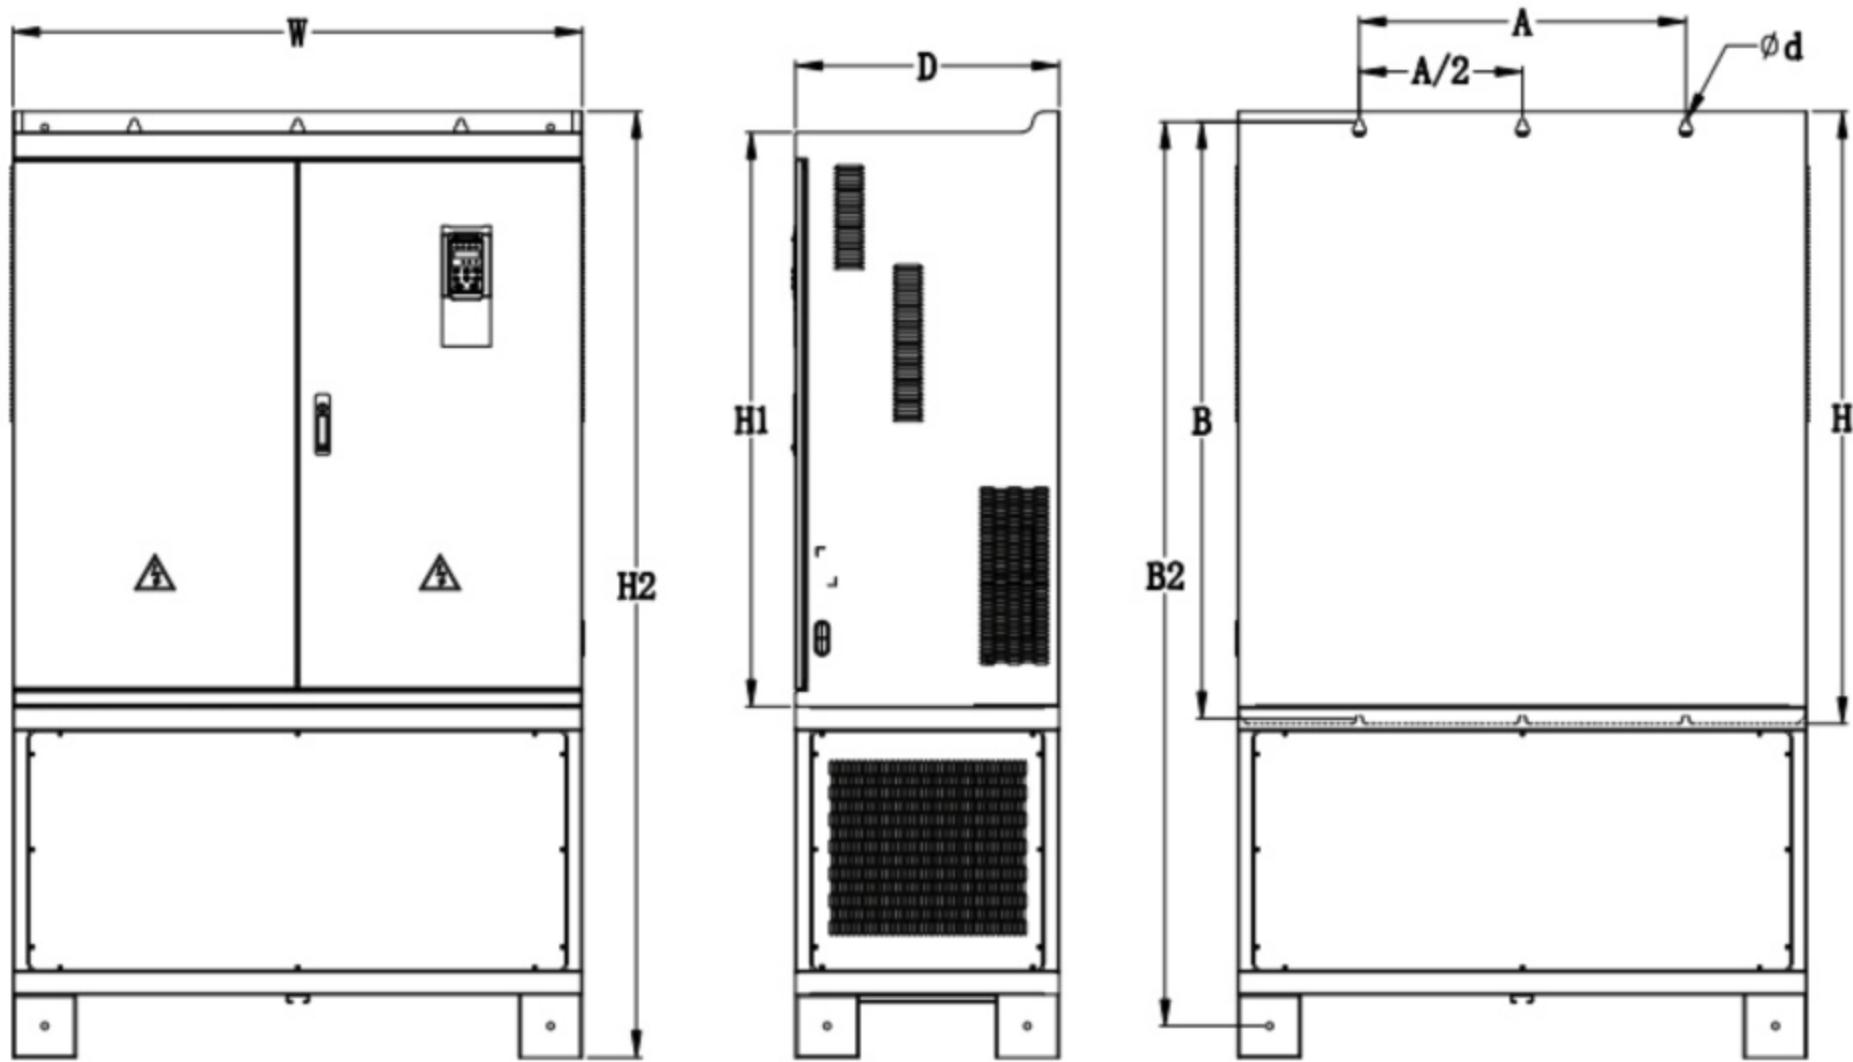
SIZE K~O(315KW-710KW) Dimensions
